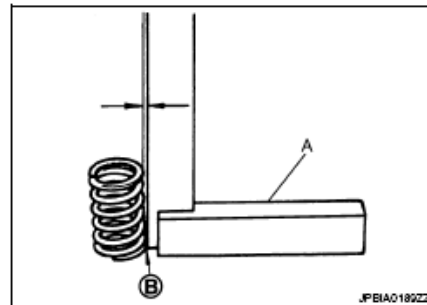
Measuring Clearance Between Top Of Spring And Try Square
